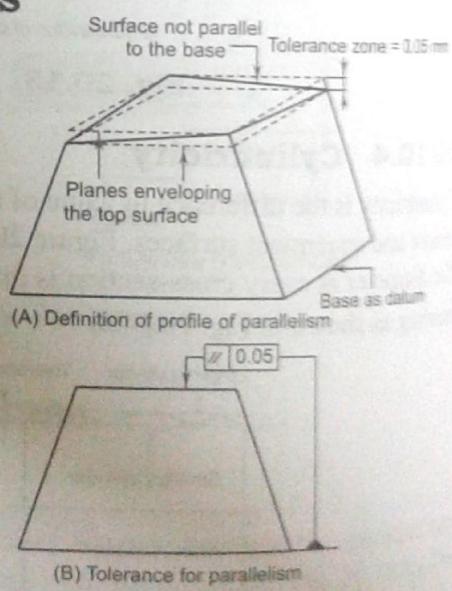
Indicating Parallelism of a Surface on a Drawing
